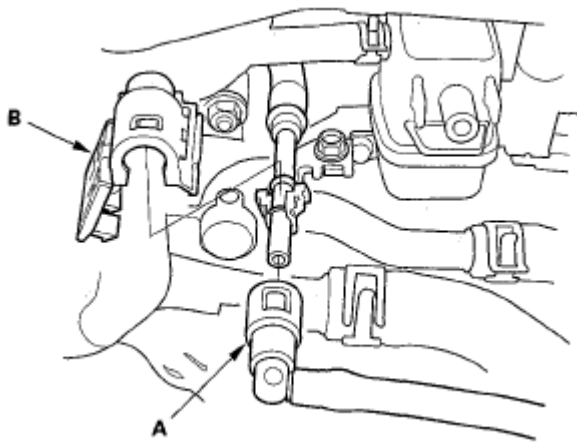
Identifying Fuel Feed Hose And Quick-Connect Fitting Cover
